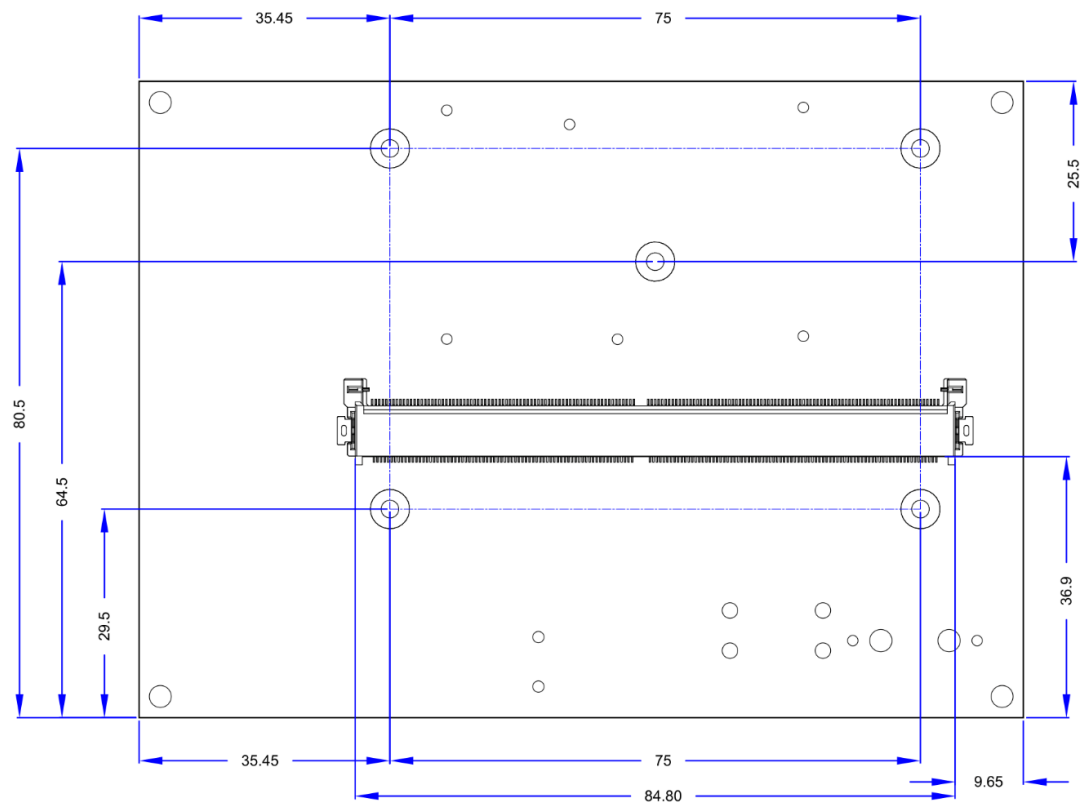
Ixora Carrier Board SoM connector and spacer positions (in millimeters) - top side (top view)
